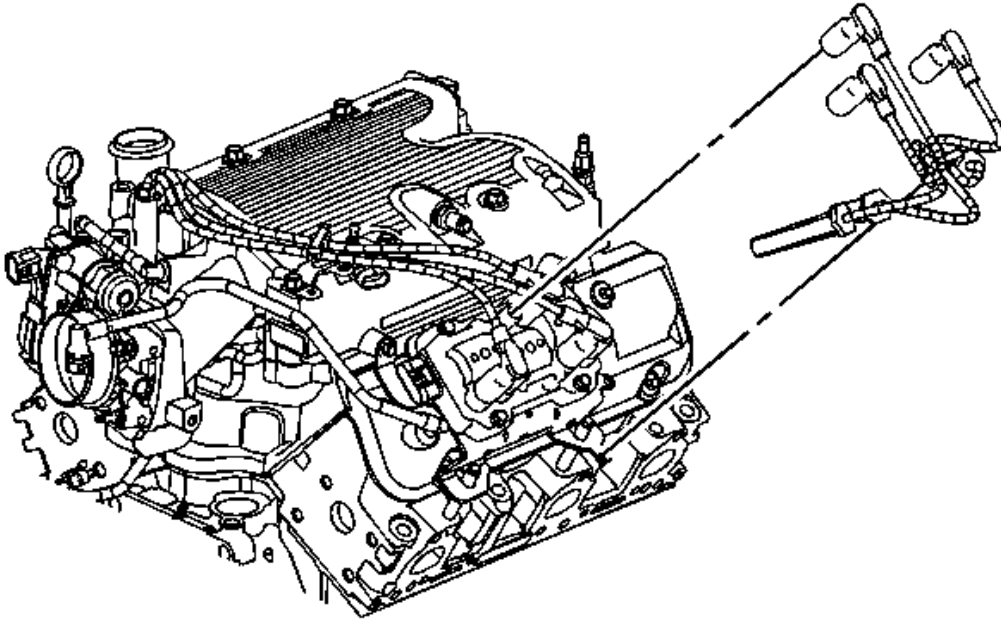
Right Side Spark Plug Wires & Ignition Coil
